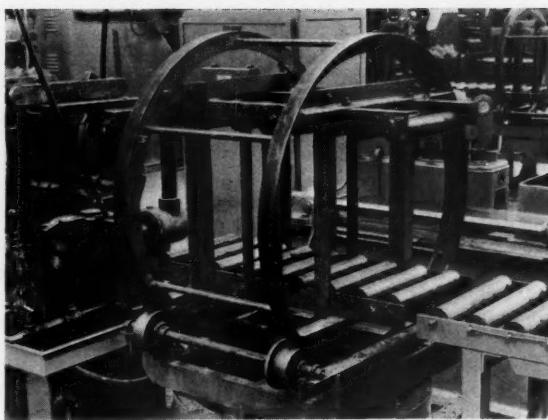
Roll-over device in the machine conveyor line for cylinder blocks.
